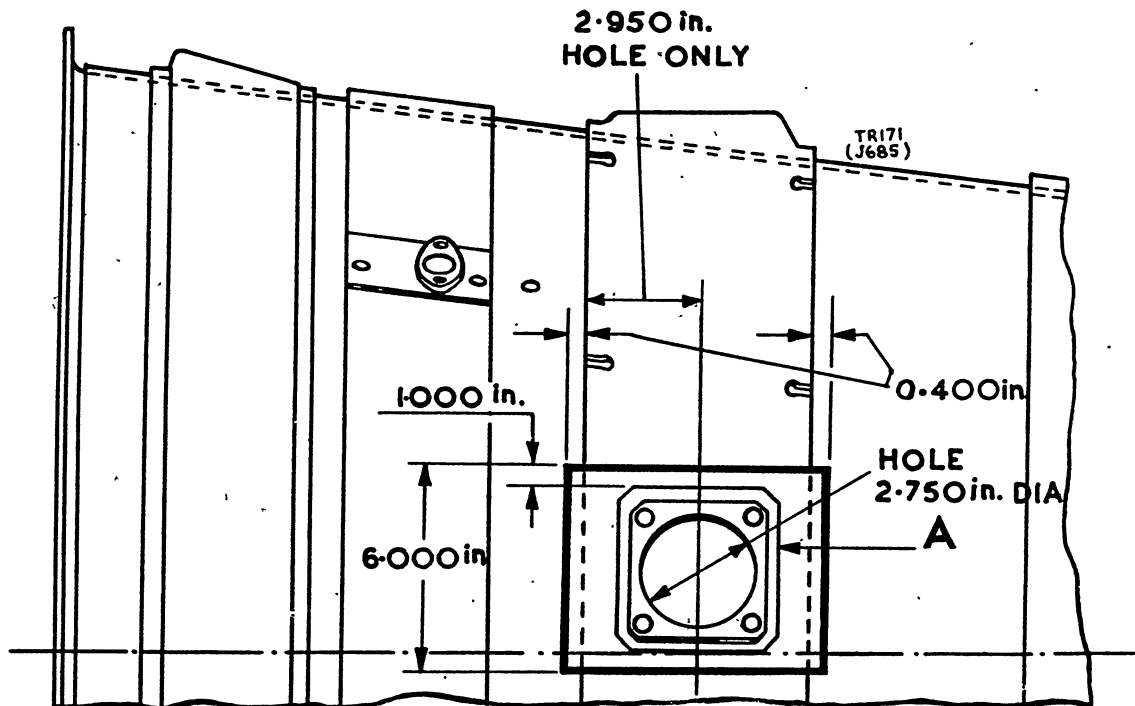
Method of cutting away damaged flange and sole plate from heater muff
